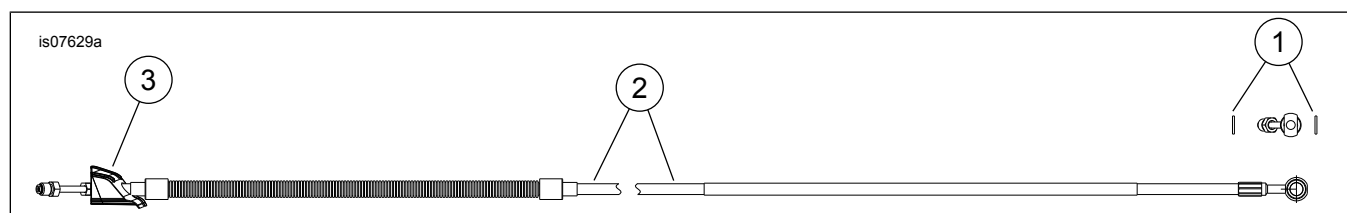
Service Parts: Hydraulic Clutch Line Kits
